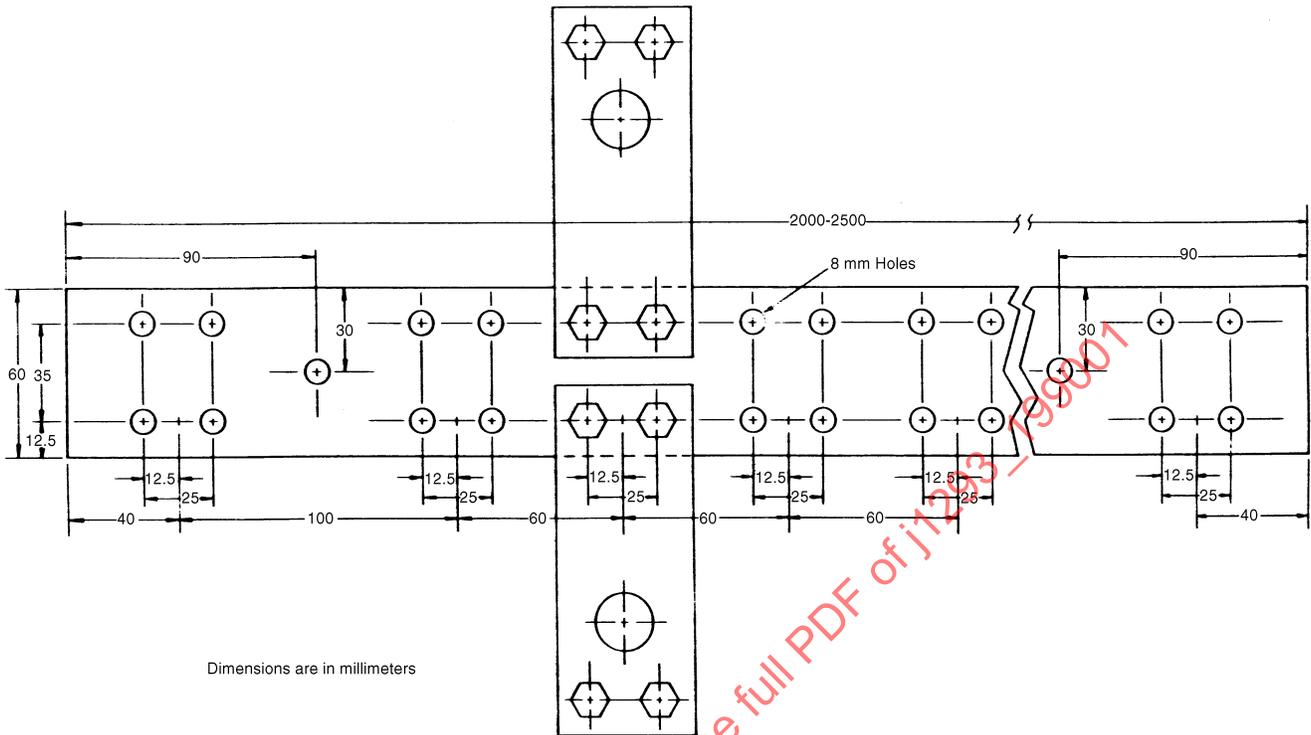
TYPICAL TEST RACK ASSEMBLY WITH TWO SAMPLES - TOP VIEW
